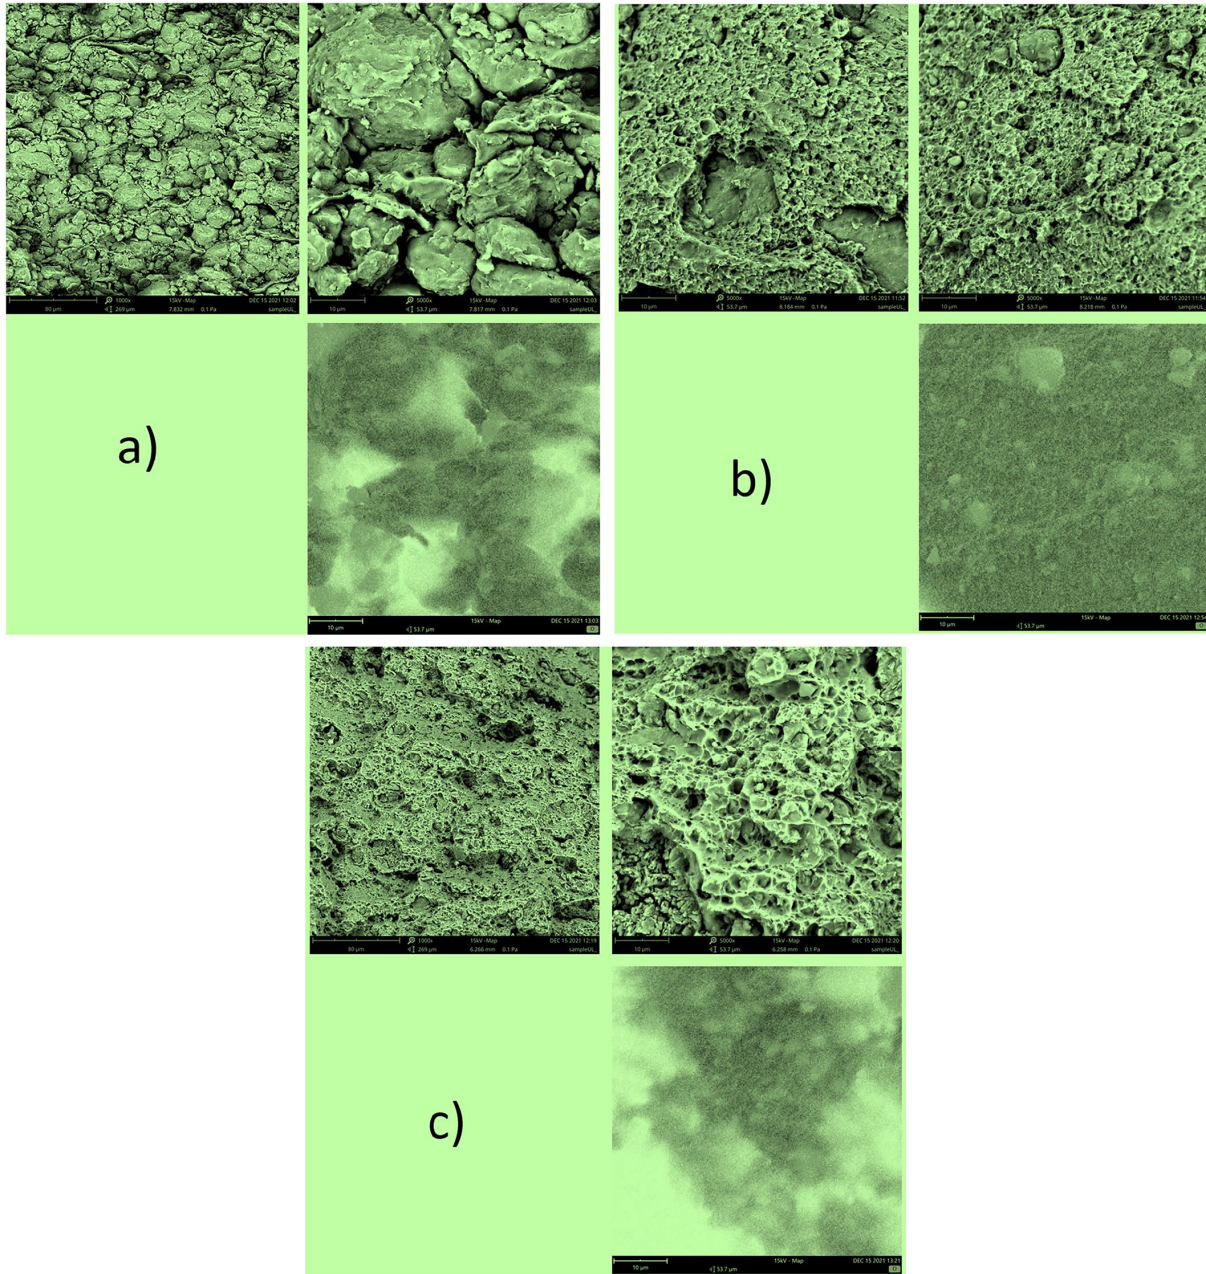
Fracture surface aspect of the joints after bending fatigue tests friction stir welded at 1500 RPM and 32 mm/min a); 1600 RPM and 32 mm/min b); 1900 RPM and 37 mm/min c).
